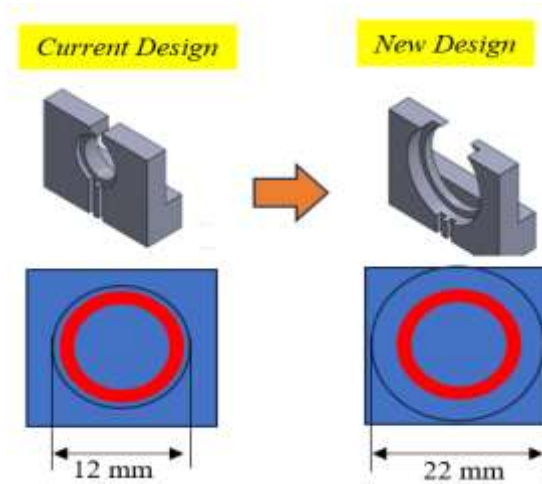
Changes to the design of the coil heater machine cover for PT UII's annealing GDI.
